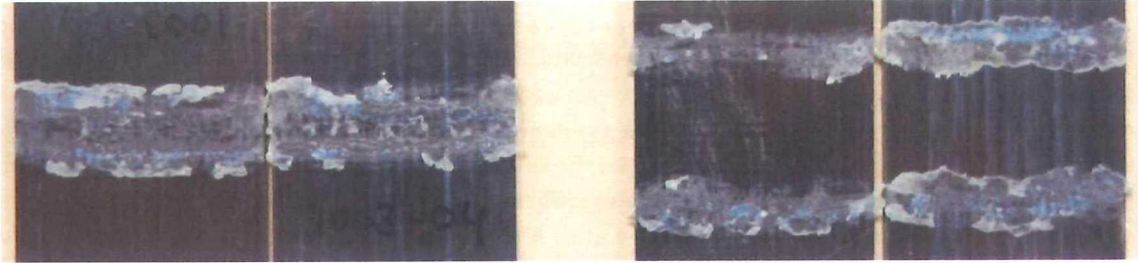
Fracture surfaces of sample USW141003-04 (left) with an ED spacing of 3 [mm] and welded with 750 [J] and sample USW141010-07 (right) with an ED spacing of 12.7 [mm] and welded with 1,000 [J]. In case of the left sample, the flow fronts have met.
